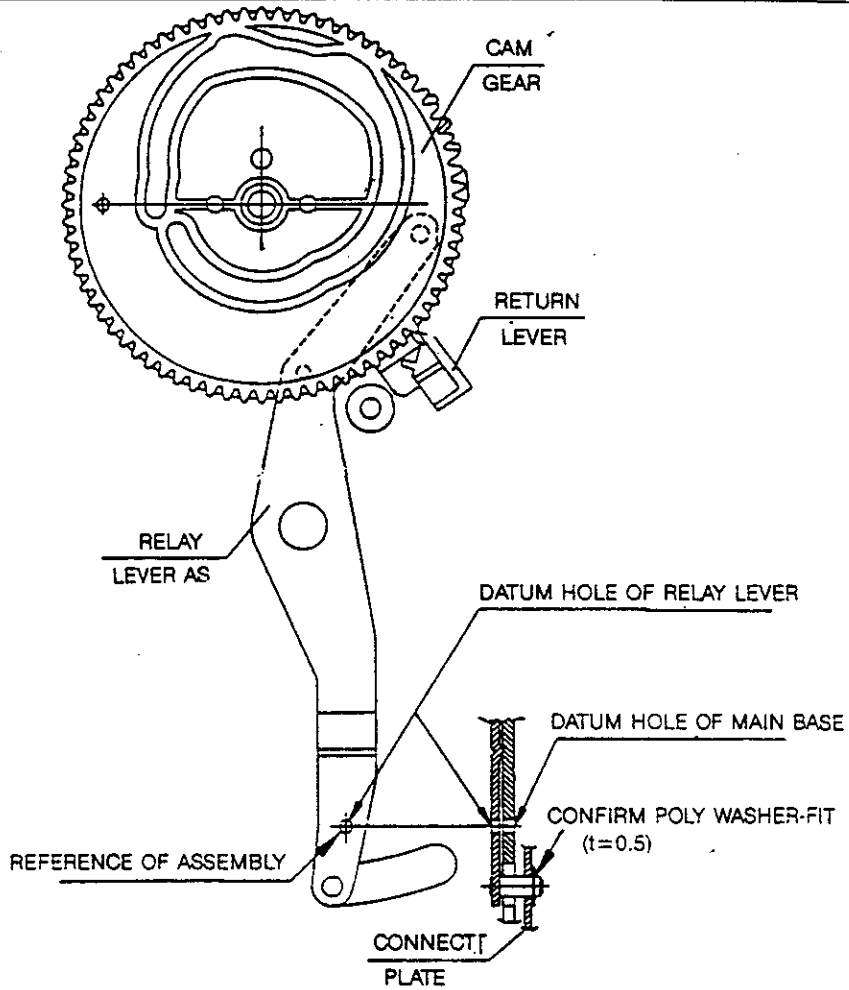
Reference of assembly for the Cam Gear and Relay Lever
